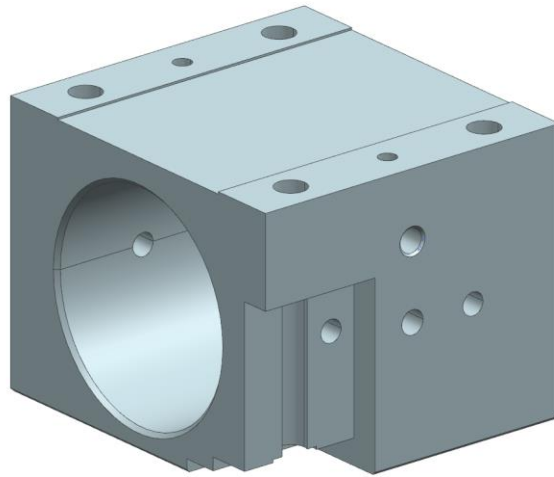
Isometric view of modified Air Bushing Mounting Block.
